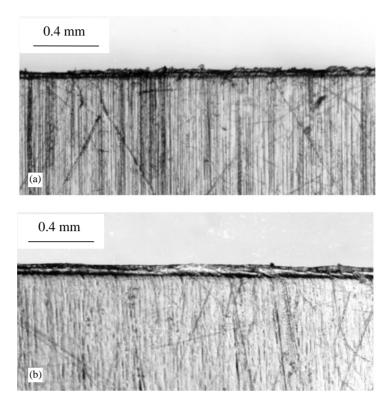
The damaged layer beneath the cutting surface of LDPE at the cutting speeds of: (a) 1 mm/min; and (b) 20,000 mm/min.
